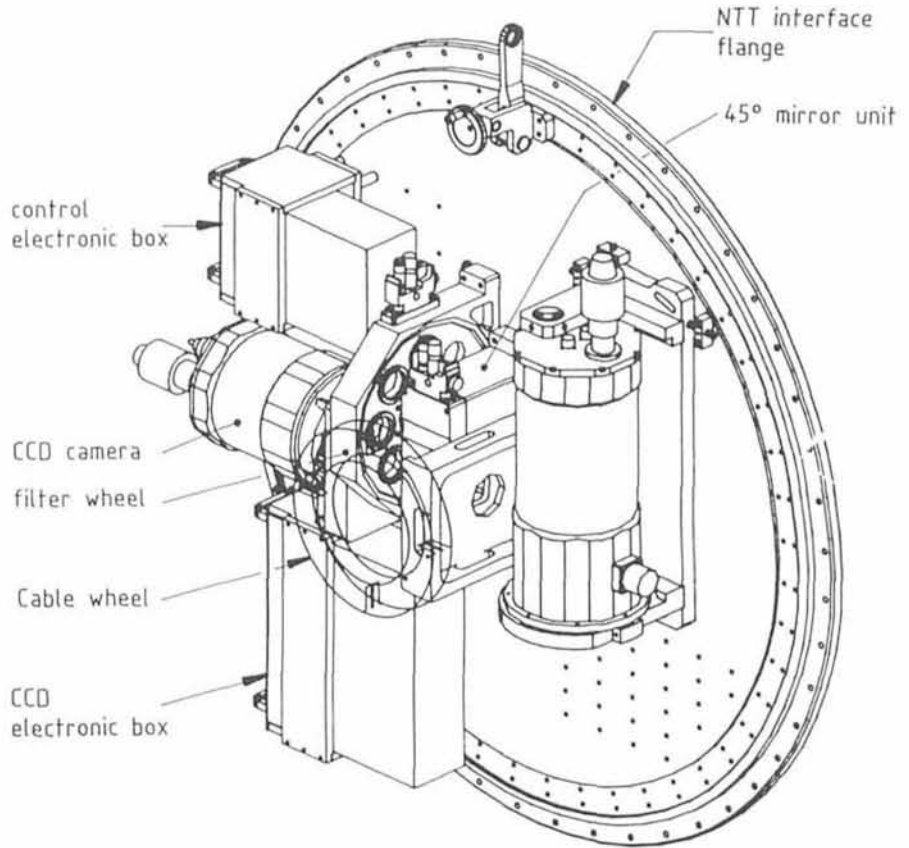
Technical details of SUSI components. The second dewar could be an infrared array camera or will be used as counterweight.
